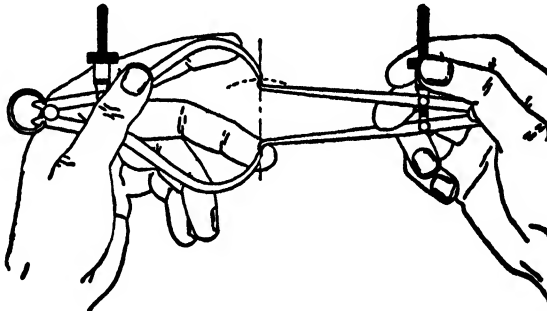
Transferring a measurement from one caliper to another. In a similar manner a measurement may be transferred between a micrometer caliper and a plain caliper. (South Bend Lathe Works)
